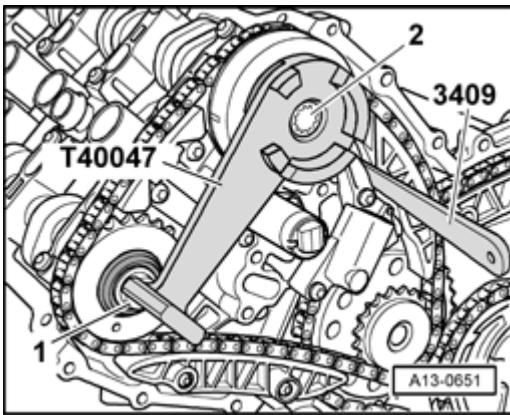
Securing Hall Sensor Wheel On Camshaft Adjuster Of Intake Camshaft Of Left Cylinder Head Using Setting Gauge T40047
